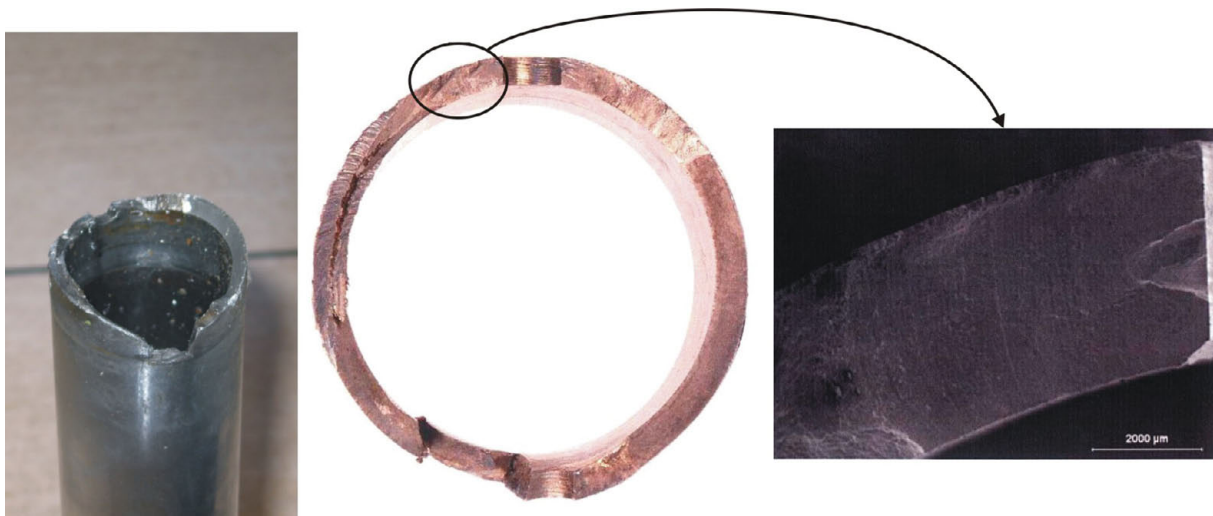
Fracture of the lower piston section. View of fractured area and macrofractographic detail of area indicated
